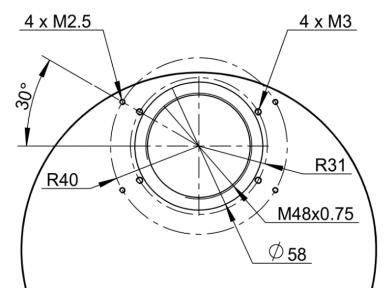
Back shell of 7x36mm filter wheel (Camera side)
